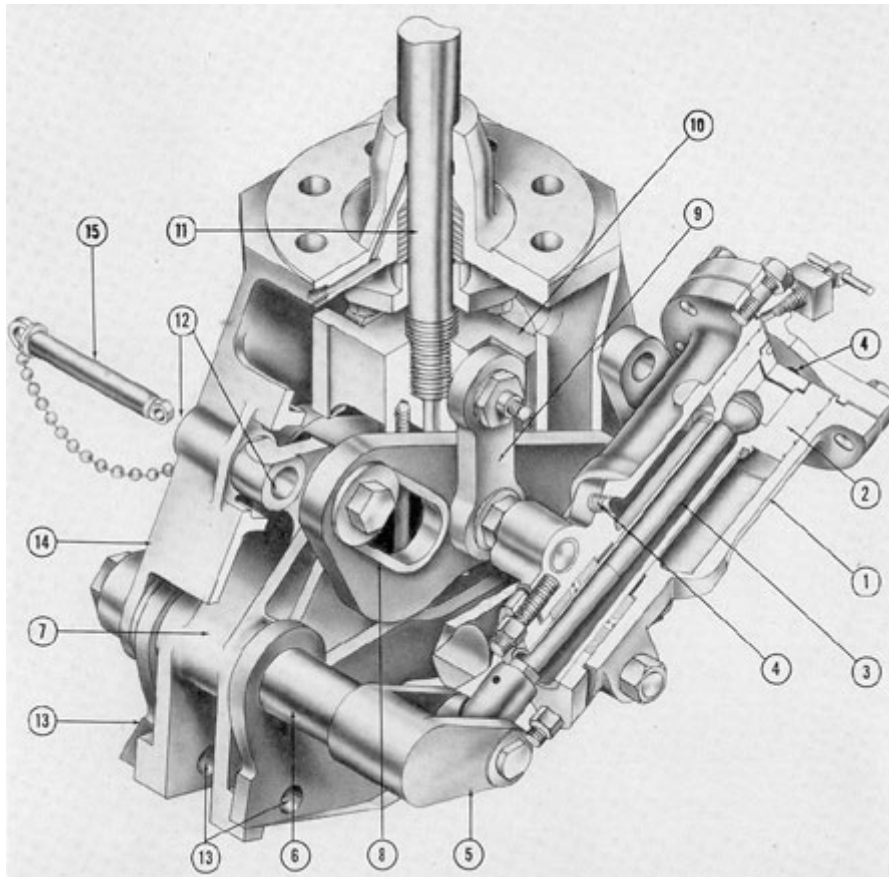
Cutaway of vent valve hydraulic unit cylinder and operating gear.
